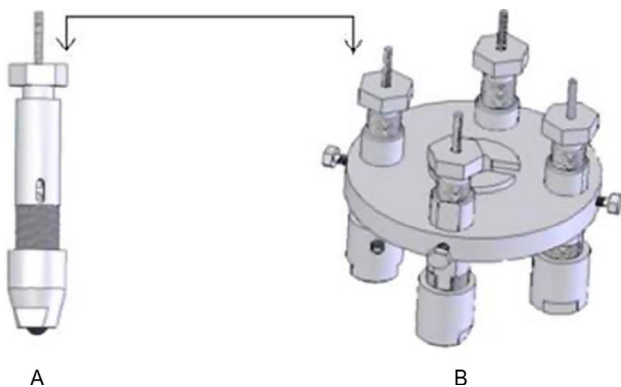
(A) The simple ball burnishing tool and the (B) tool holder with four ball burnishing tools [13].
